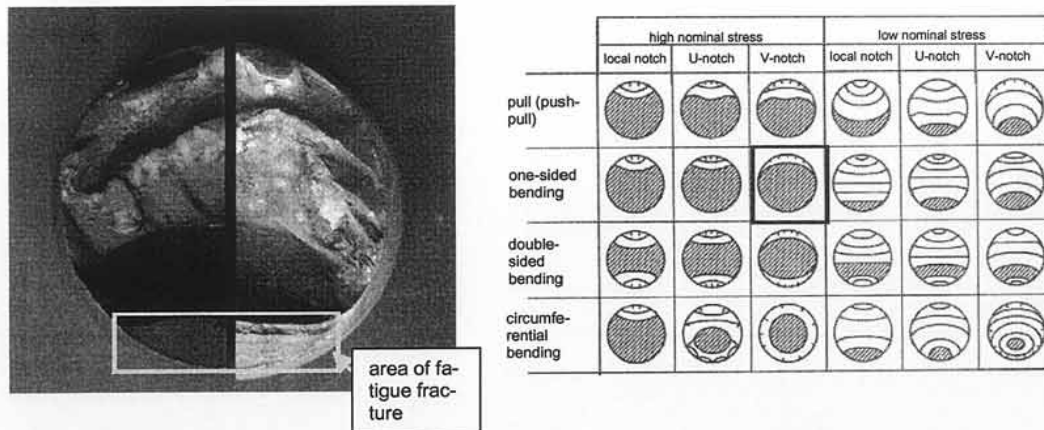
Fracture area with fatigue fracture and forced fracture (left), classification of fracture areas according to the basic forms of fatigue fractures (right)
